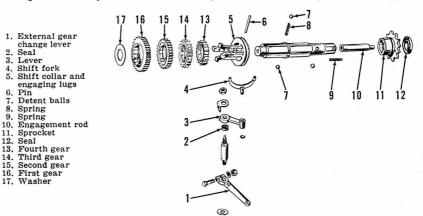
Exploded view of the four speed transmission output shaft and gears.
